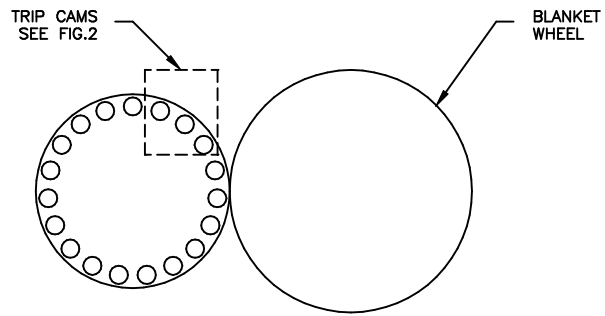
SPINDLE WHEEL & BLANKET WHEEL
